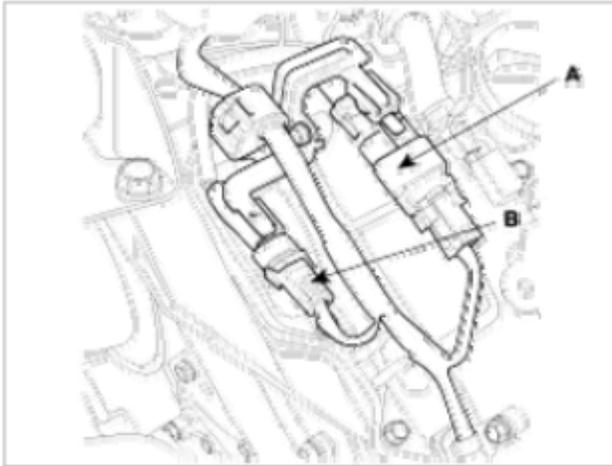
Locating OCV Connector And Knock Sensor Connector
